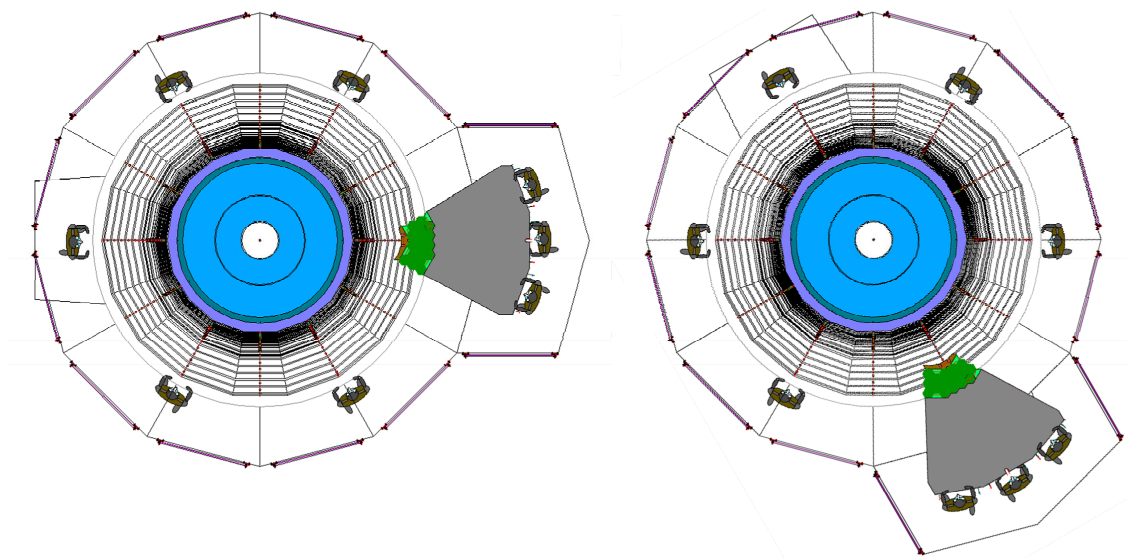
Cassettes insertion platform extensions on the two adjacent HGCAL assembly tables that required for insertion of the CE-H cassettes. Interlocking pairs of  $30^\circ$  cassettes that have been joined to form  $60^\circ$  insertion units are shown.
